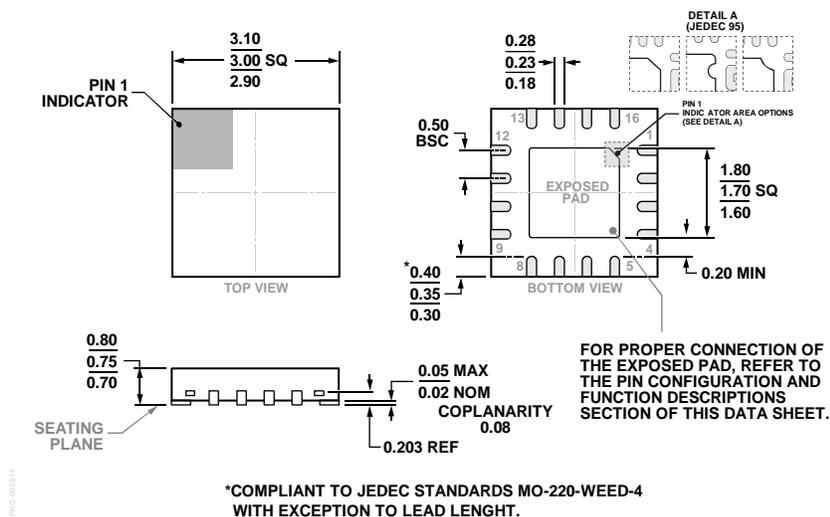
16-Lead Lead Frame Chip Scale Package [LFCSP]
